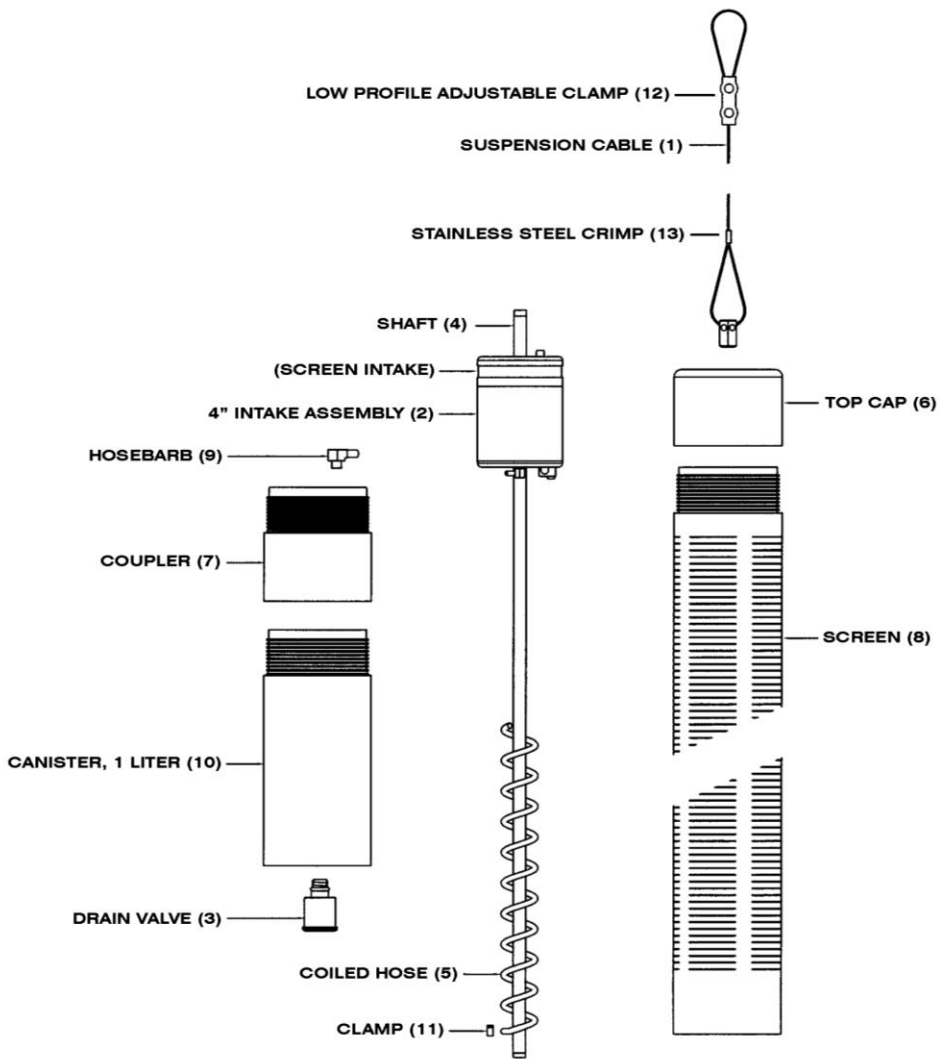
Standard 4" PRC Skimmer Assembly (1 Liter)
